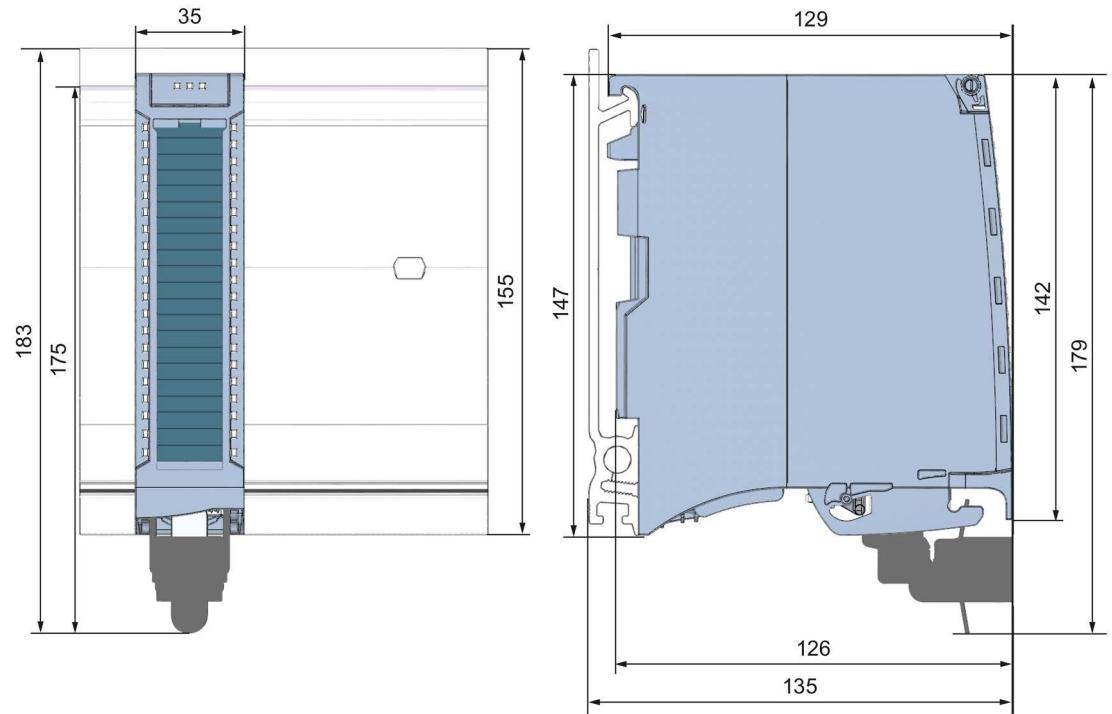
Dimensional drawing of the AI 8xU/I/R/RTD BA module
